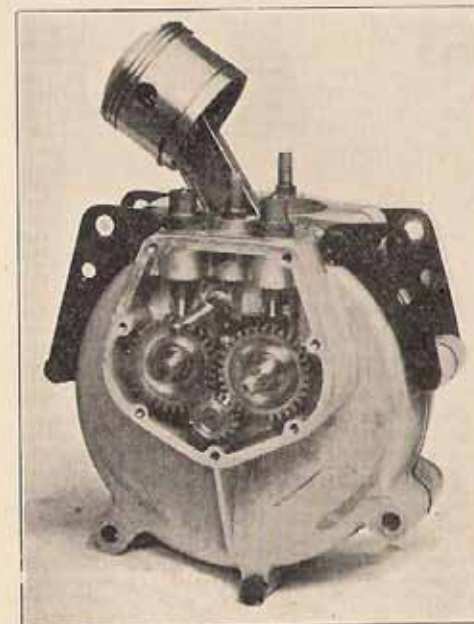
THE 3-49 H.P. MODEL M6 ENGINE
